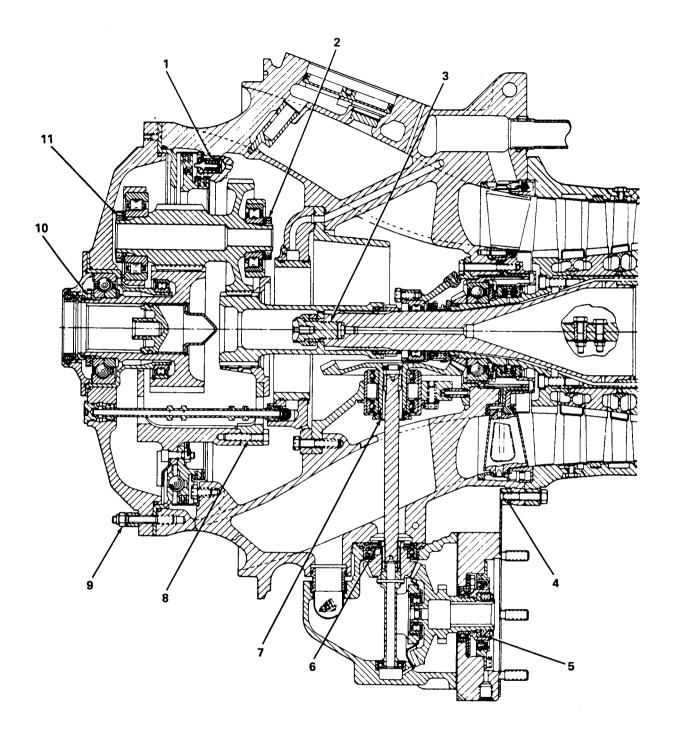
Special Torque Value Locations (T53-L-13B/703 Engines) (Sheet 1 of 5)
